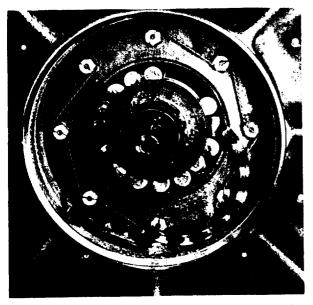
Bearing failure resulting from oil interruption. Engine with jet lubrication of bearings. Photograph shows cage has failed completely. Failure occurred 17 minutes after oil interruption (from ref. 1, appendix B). Other photographs of this engine in figures 6 and 7.
